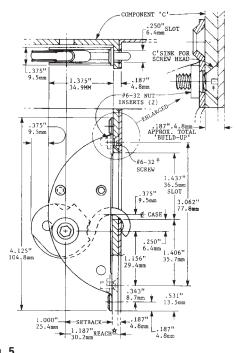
MOUNTING DIMENSIONS LATCH: S1125-2S-1.000/6-32
